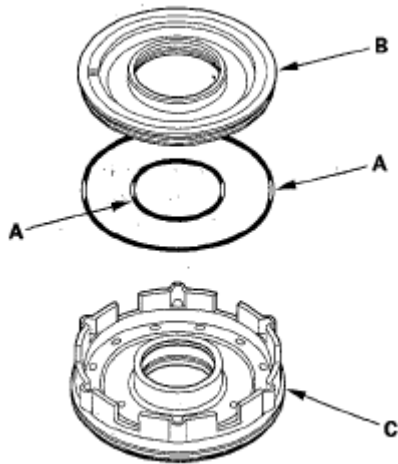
Identifying G-Rings, 1St-Hold Clutch Piston And 1St Clutch Piston
